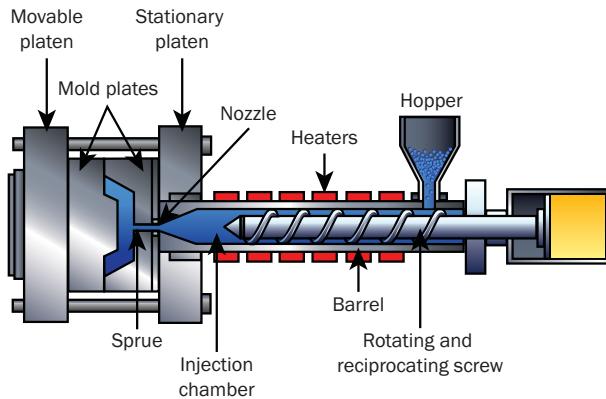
A single screw injection-molding machine for thermoplastics, showing the plasticizing screw, a barrel, band heaters to heat the barrel, a stationary platen, and a movable platen
